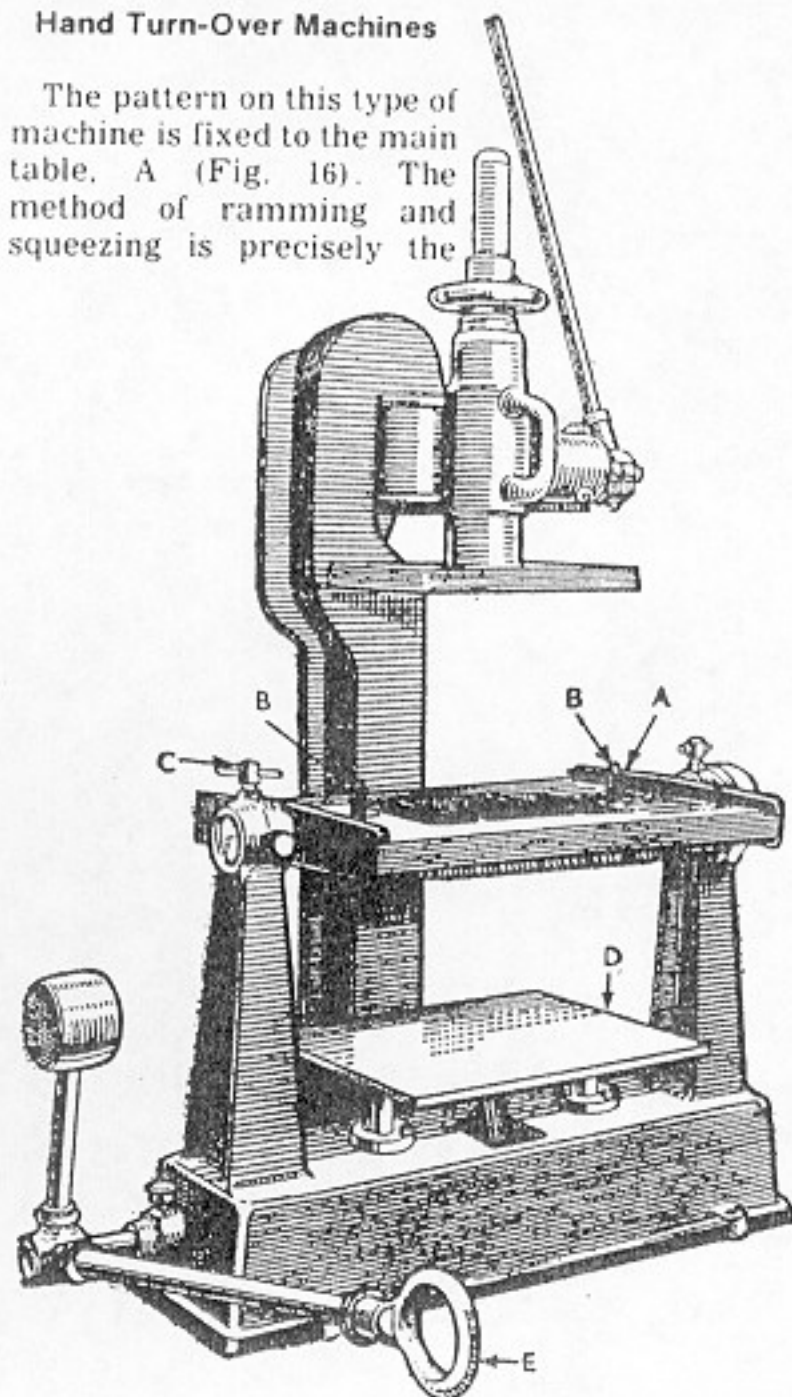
The turn-over machine, shown above, differs from the straight-draw in that it draws the mold away from the pattern in a downward direction. It is used mainly where the mold contains large sand projections, or cuds. The pattern is fixed to the main table A and the box placed over it. The method of ramming and squeezing is exactly the same as with the straight-draw machine (Fig. 15). After squeezing, the flask is clamped to the table by means of the pins B, and the table turned over through 180 deg. and locked in position by the screw C. The draw-table D is raised by the lever E to support the underside of the flask when the clamps are released and the draw-table lowered away.
